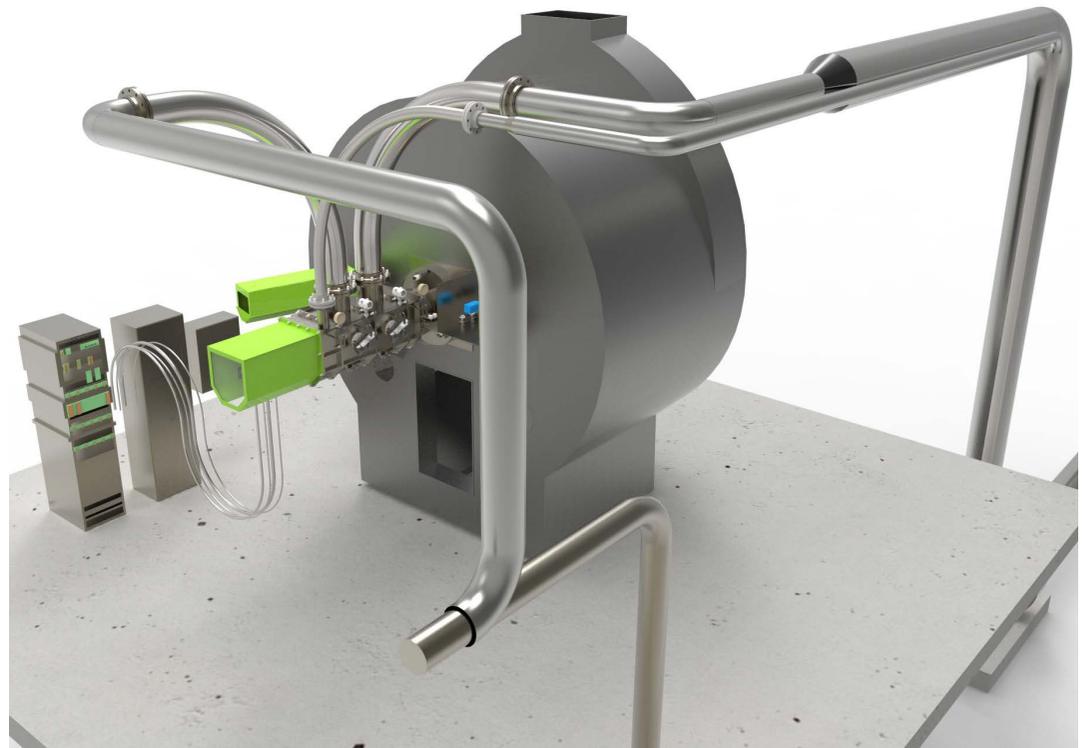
3D Cad visualisation of Bratsk Multifuel Burner System
